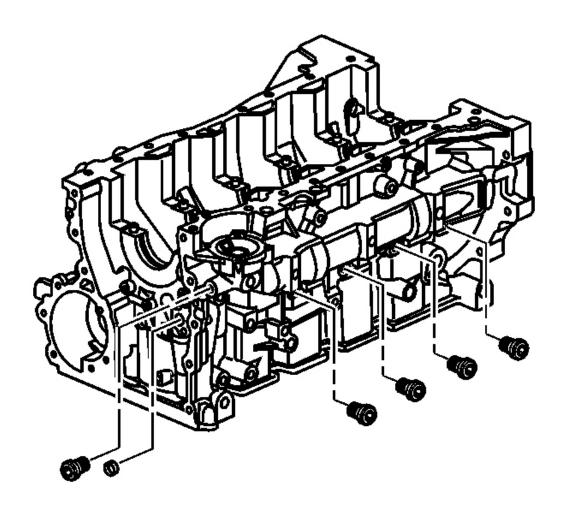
View Of Engine Block Oil Gallery Plugs Courtesy of GENERAL MOTORS CORP.
